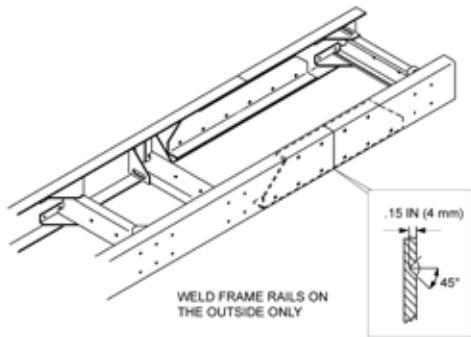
Detail of Frame Extension and Joint Welding
